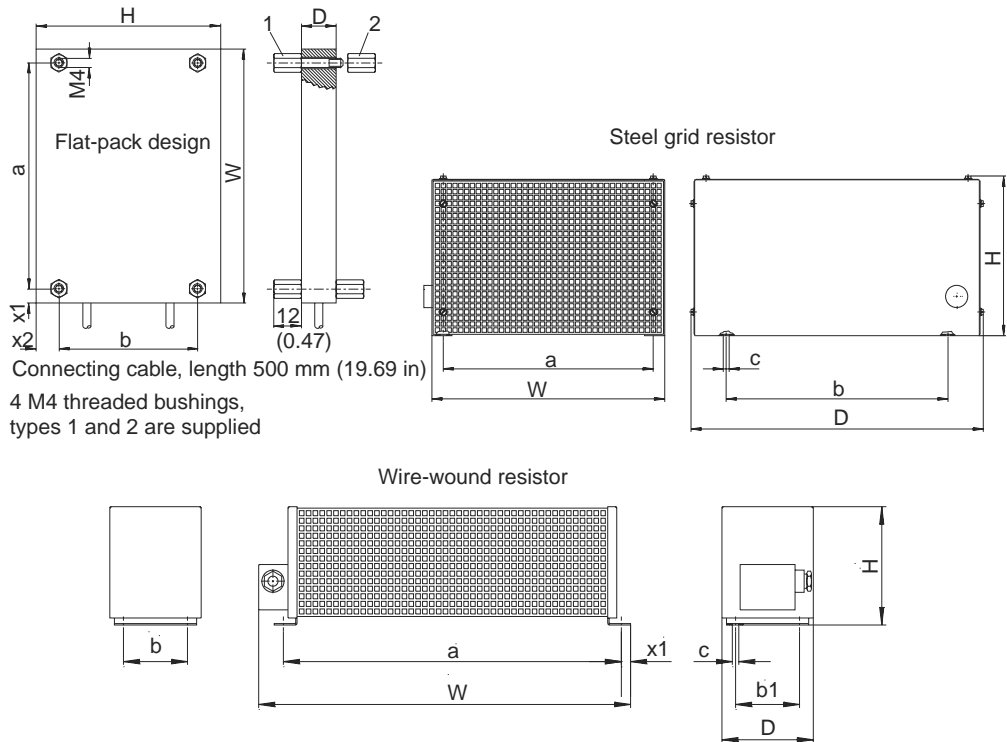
Dimensions, DKB11A heat sink for brake resistors in flatpack design in mm (in) 03826AEN
